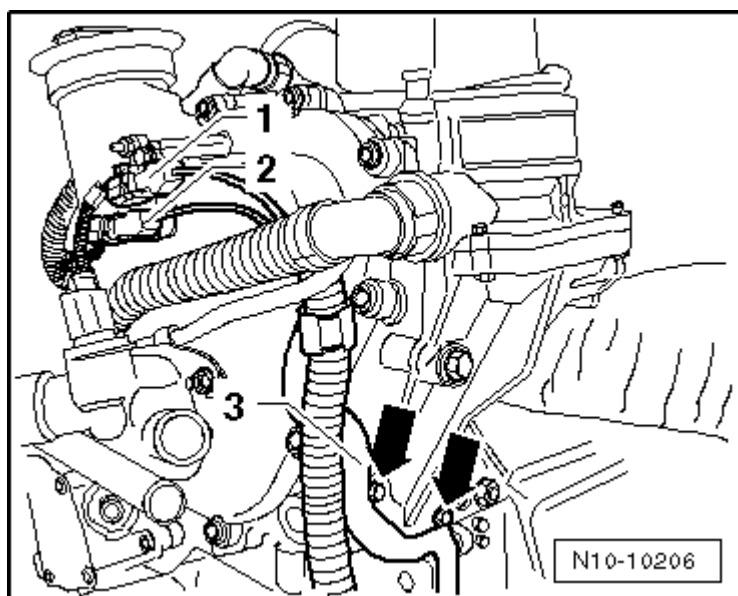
Disconnecting Harness Connectors And Removing Bracket
